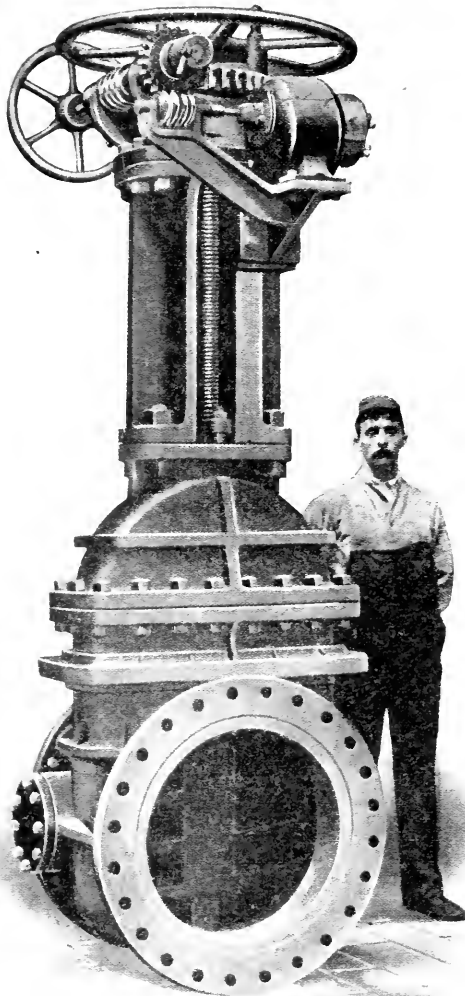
A 24-Inch Gate-Valve of Single-Disc Type, with Outside Screw and Yoke and Rising Spindle. Arranged for operating by electric motor, and provided with roller bearings to take thrust from stem.
